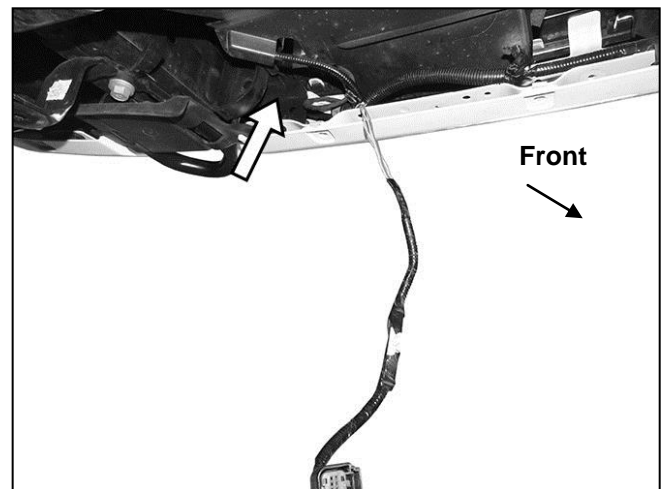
Ranger Models. Drill 5/16" hole in 2nd location (arrow). Reinstall plastic inner shield
